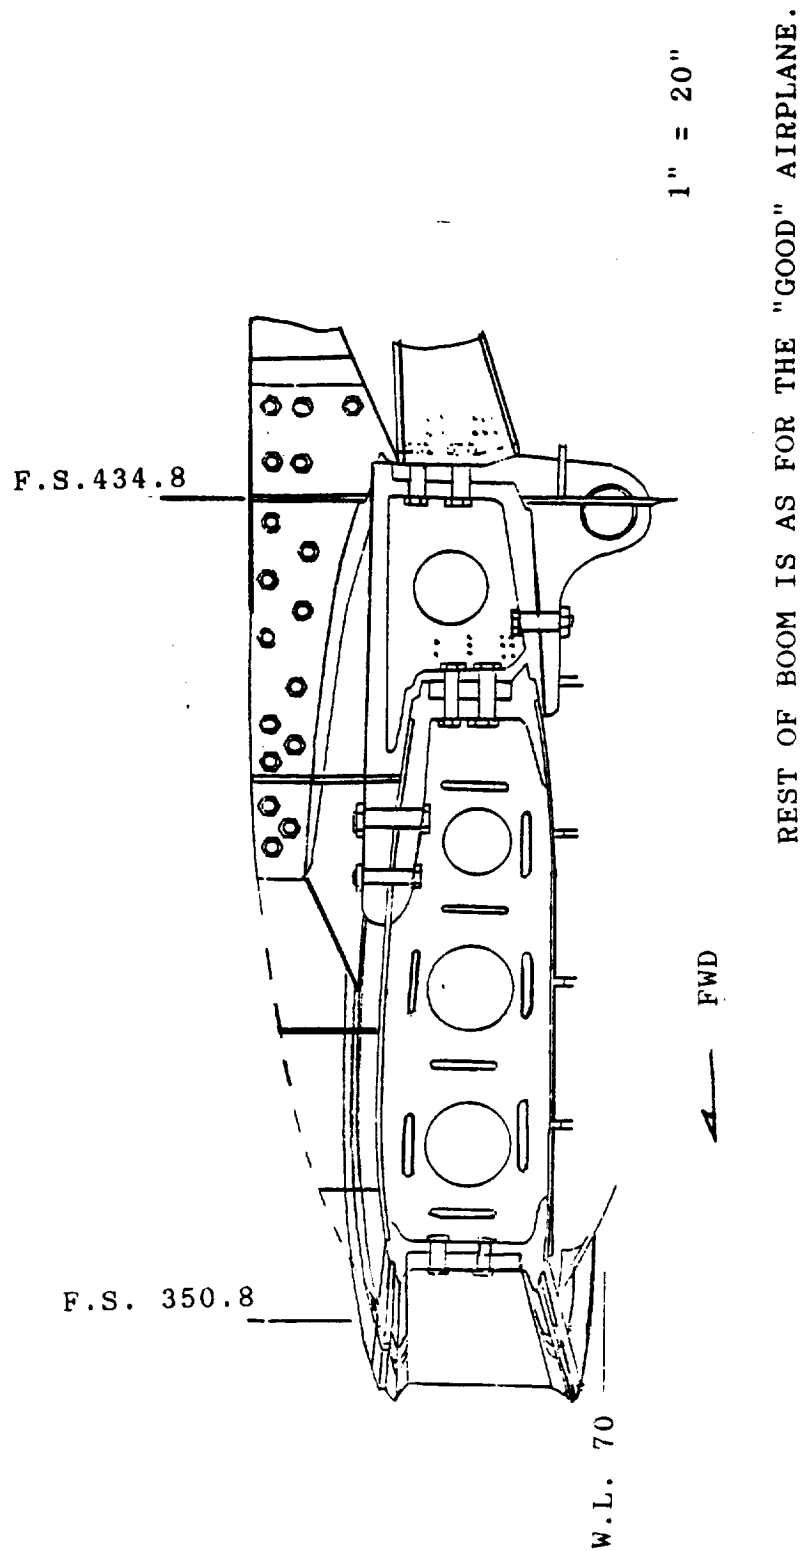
Boom and main gear attachment for the Bad airplane.(Side view)
